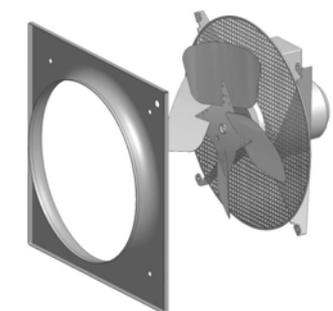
Fan in explosion-proof design with short air intake nozzle
